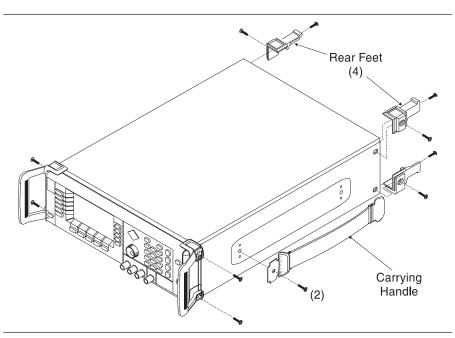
Front Handle, Feet, and Carrying Handle Removal
